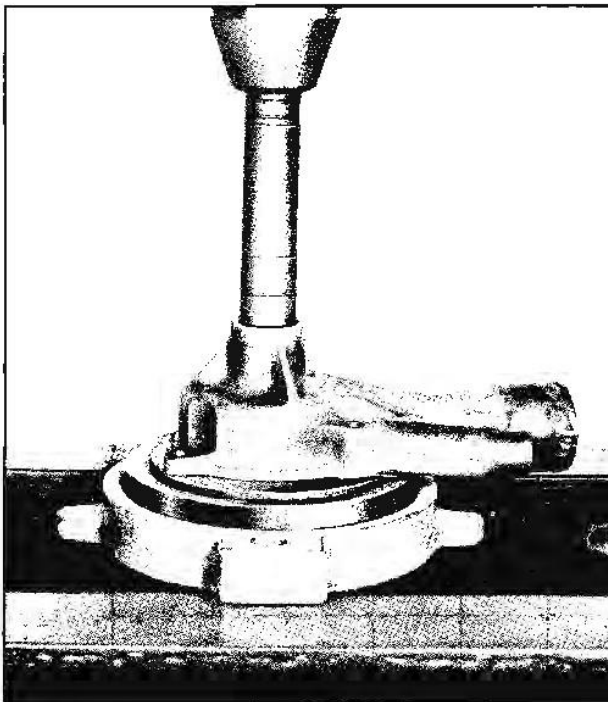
A-23 Pressing Pump Shaft and Bearing Into Pump Body Bearing Bore
